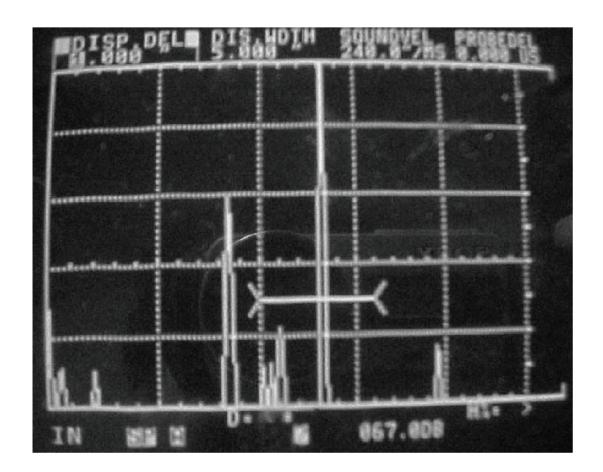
Main Rotor Grip Ultrasonic Inspection Method
